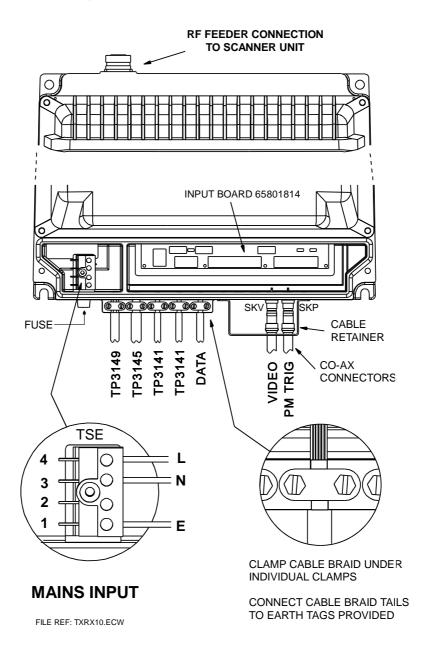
Bulkhead Transceiver - Cable Input Details
